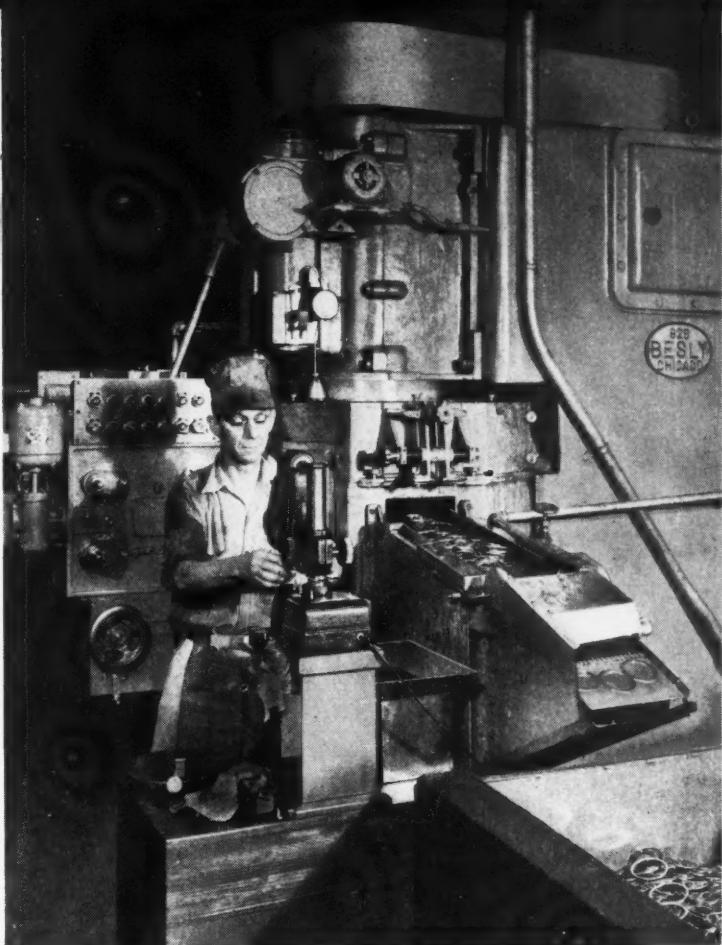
An operator spot-checks the finish-ground piston-rings for face width dimensions right at the machine
